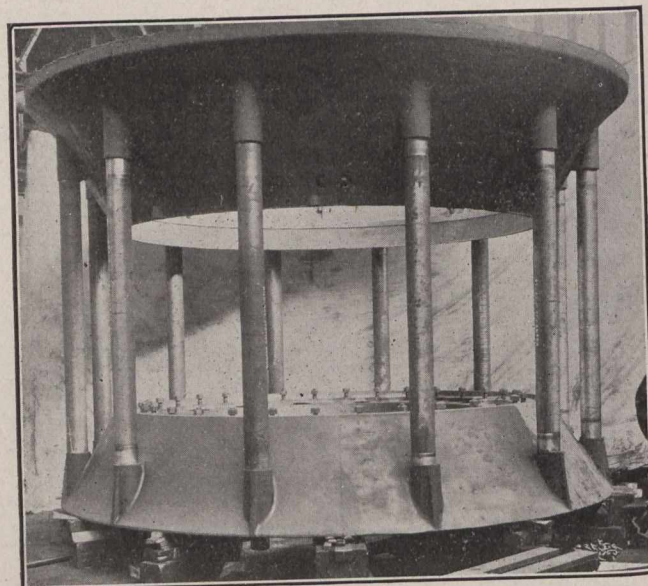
Turbine Rings and Supporting Columns. Shop View.
